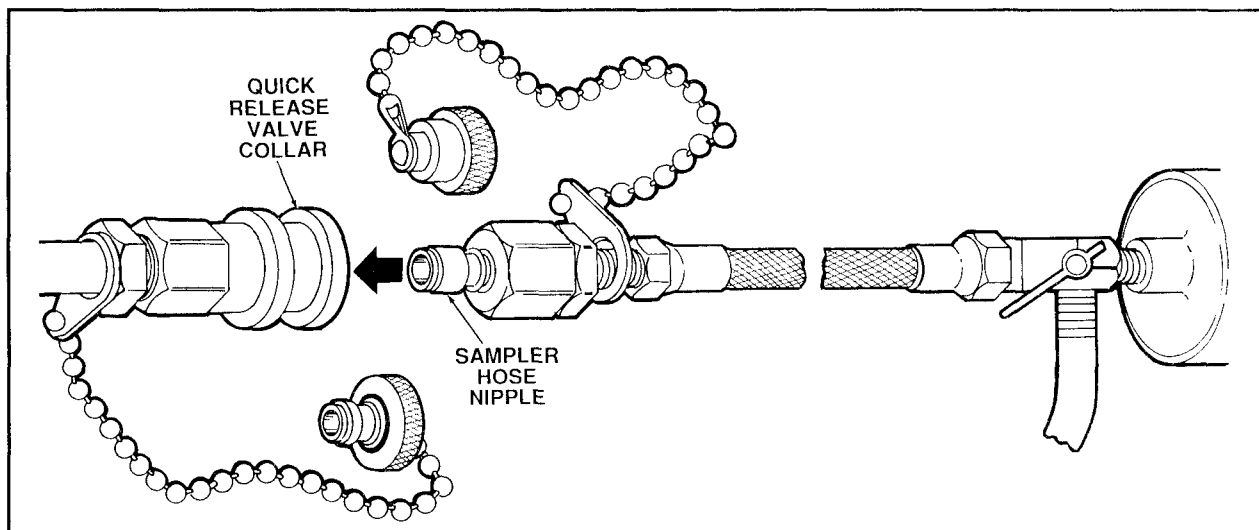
Inserting Sampler Hose Nipple into Sample Valve Collar
